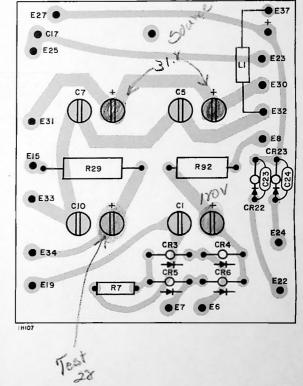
5W Exciter Power Supply Module MI-560538-B Printed Wiring Board Assemblies (TB1 and TB2)
